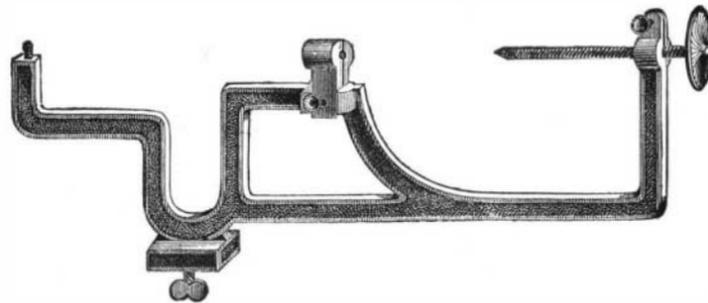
BRACKET FOR HOLDING THE HAND DRILL.
